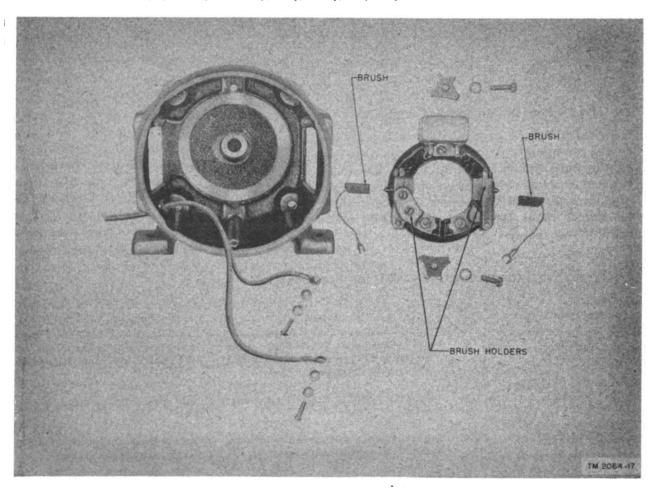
A-c end frame of the emergency ringer with brush holder assembly removed.
